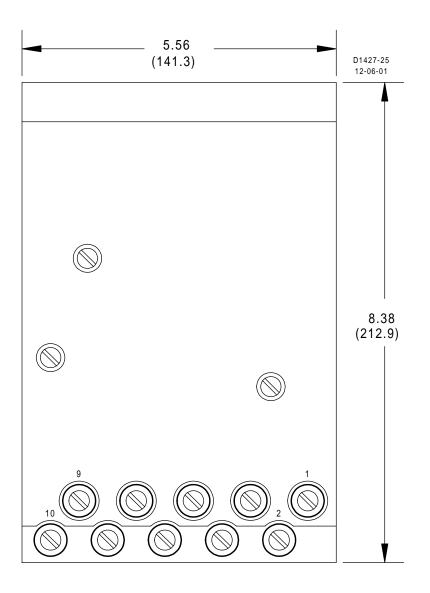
S1 Case, Single-Ended, Projection Mount, Outline Dimensions, Rear View
